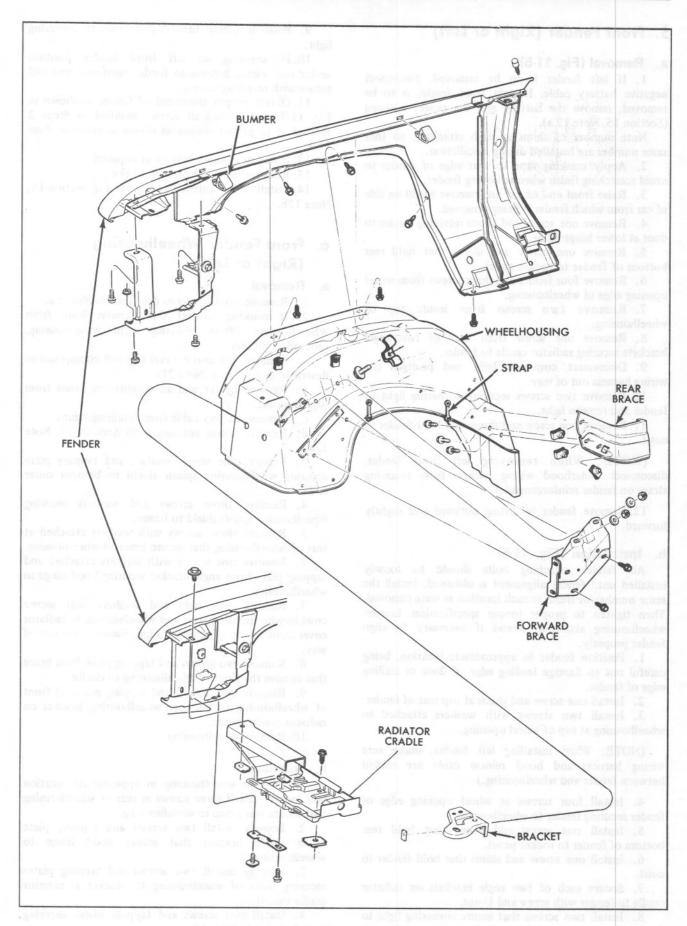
Front Fender Disassembled (Except Eldorado)
